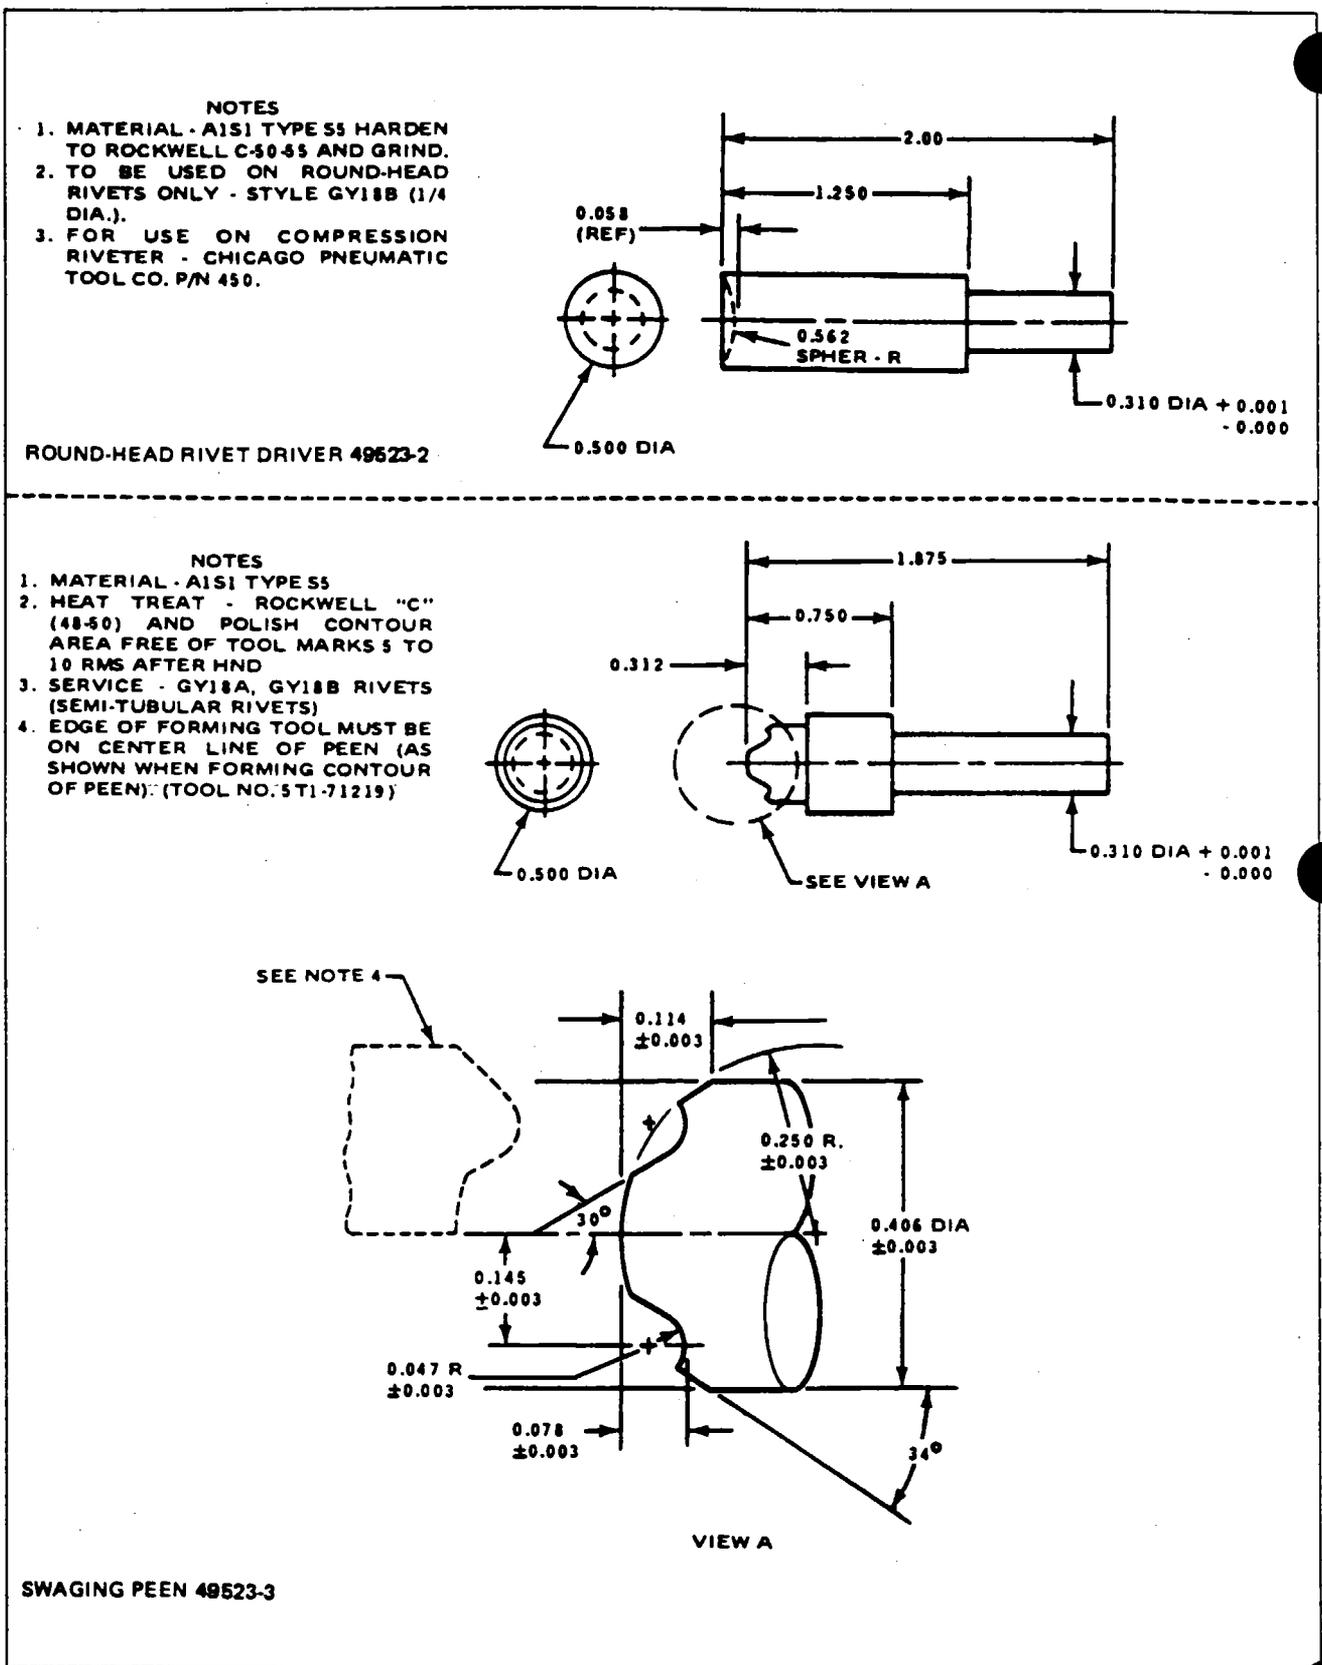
5a. Fabricated Rivet Tools. Piper P/N 49523
